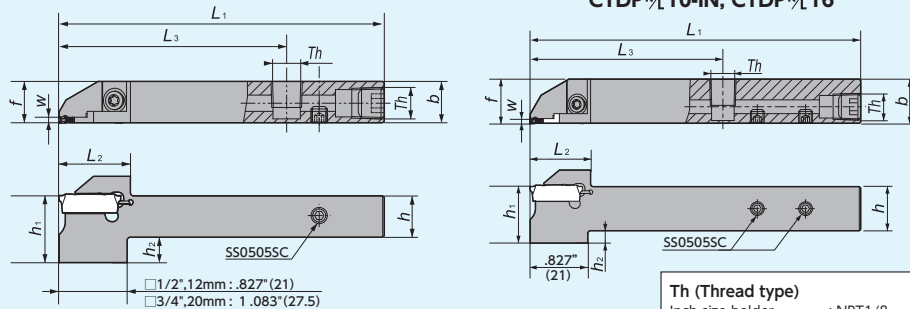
• Left-Hand holders are designed for Right-Hand machines
